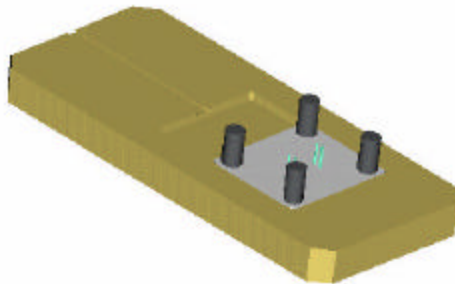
Assembled View of Tooling Configured to Cut PIN Diode Leads
